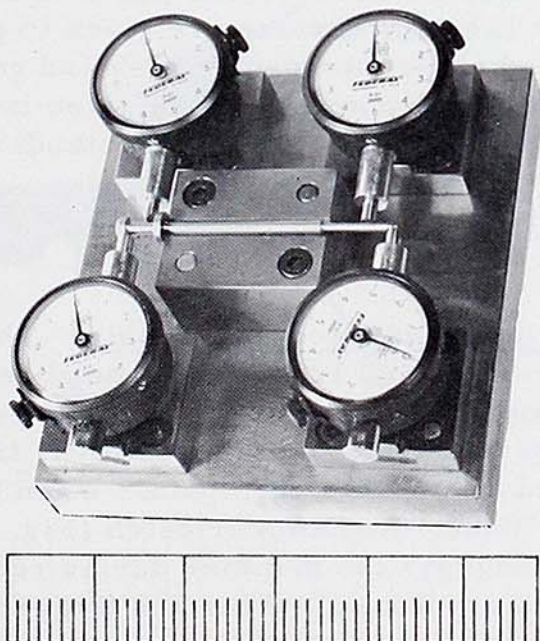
Firing Pin in Position on Dial Indicating Gage.
